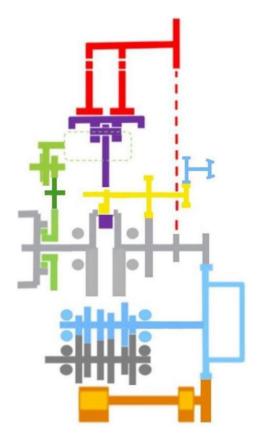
ENGINE LAYOUT HONDA CRF250R
